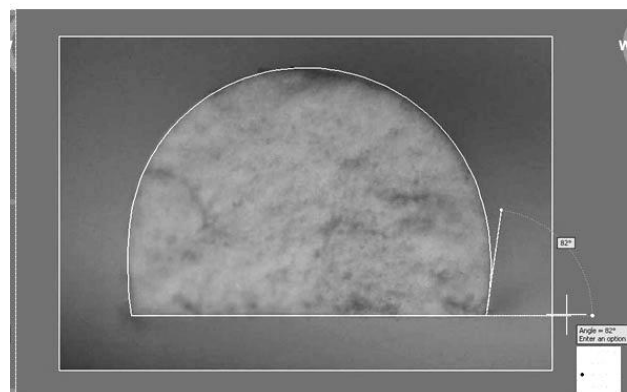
Cross section through extruded bead nearest 90° angle.
